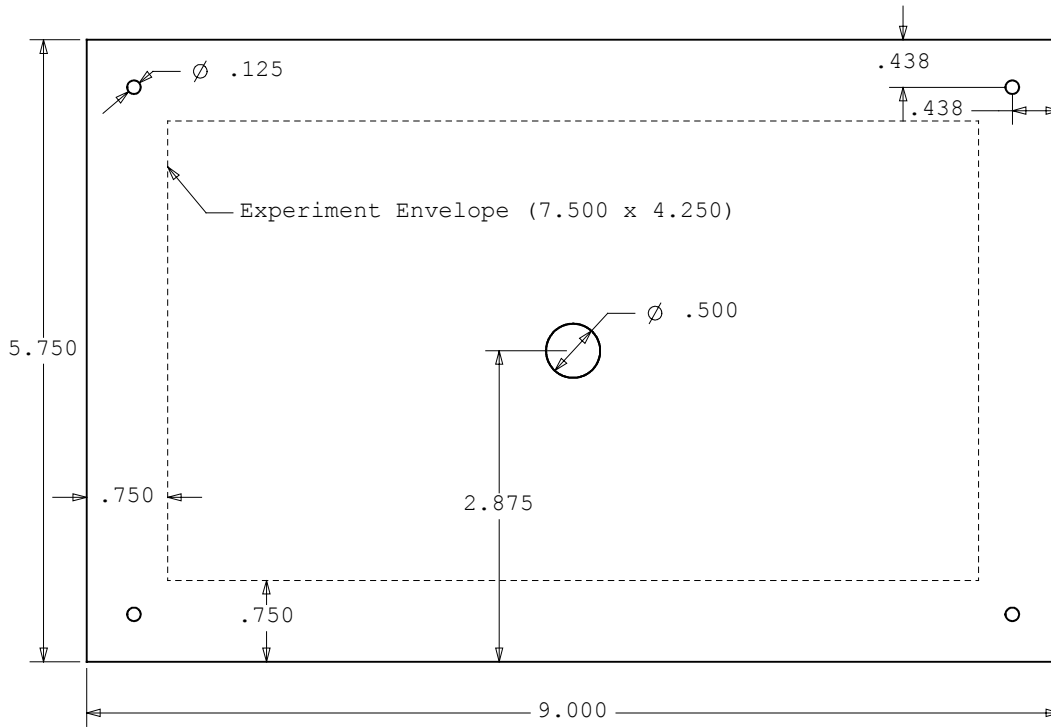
Dimensional Drawing of Carrier Plate for Footprint #2 & #3
